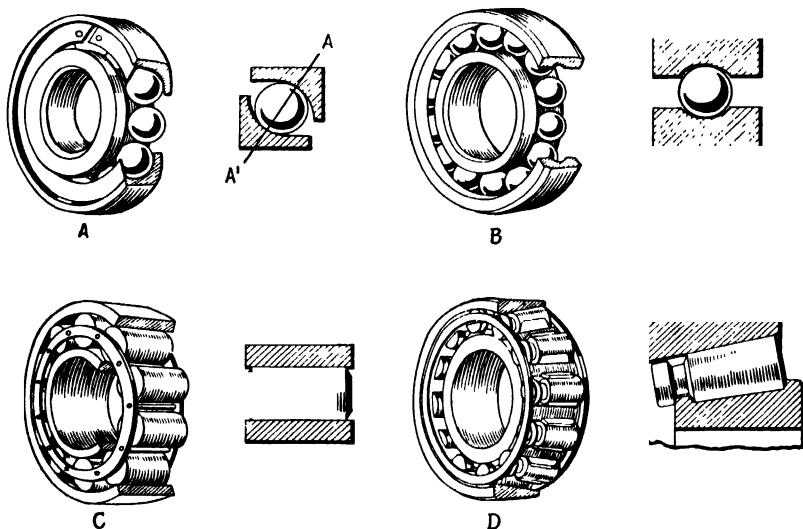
Types of Construction of Ball and Roller Bearings.
